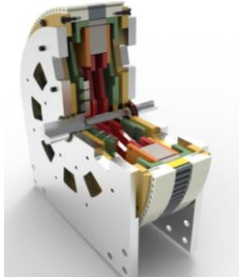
A 90-degree cut-away view of the stage 2 MG showing all the interior mechanical components.
